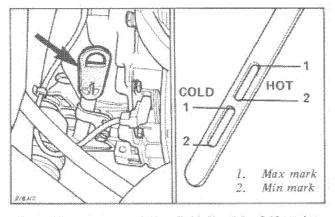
Auto transmission fluid dipstick - 841 engine
